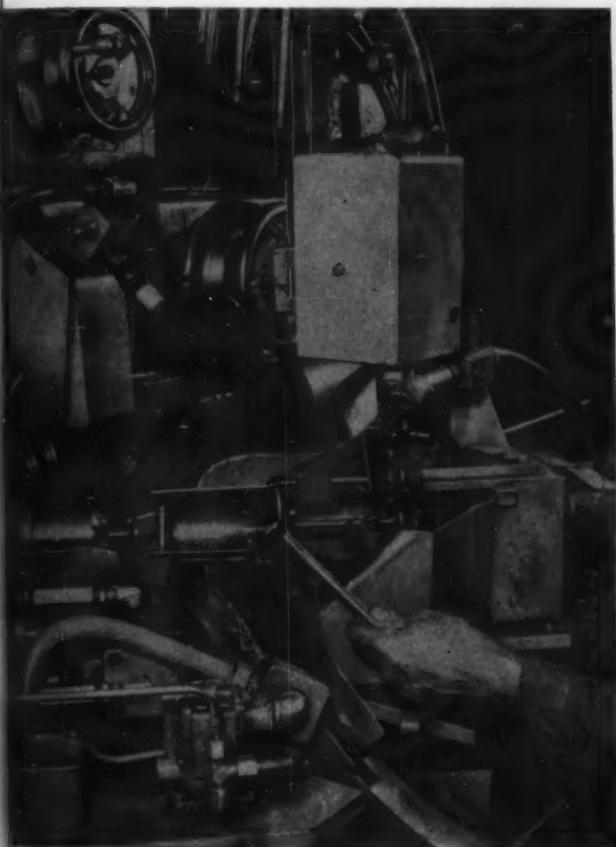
(Above) Angular-head, cylindrical grinding machine for finishing the valve faces is automatically loaded and unloaded.
